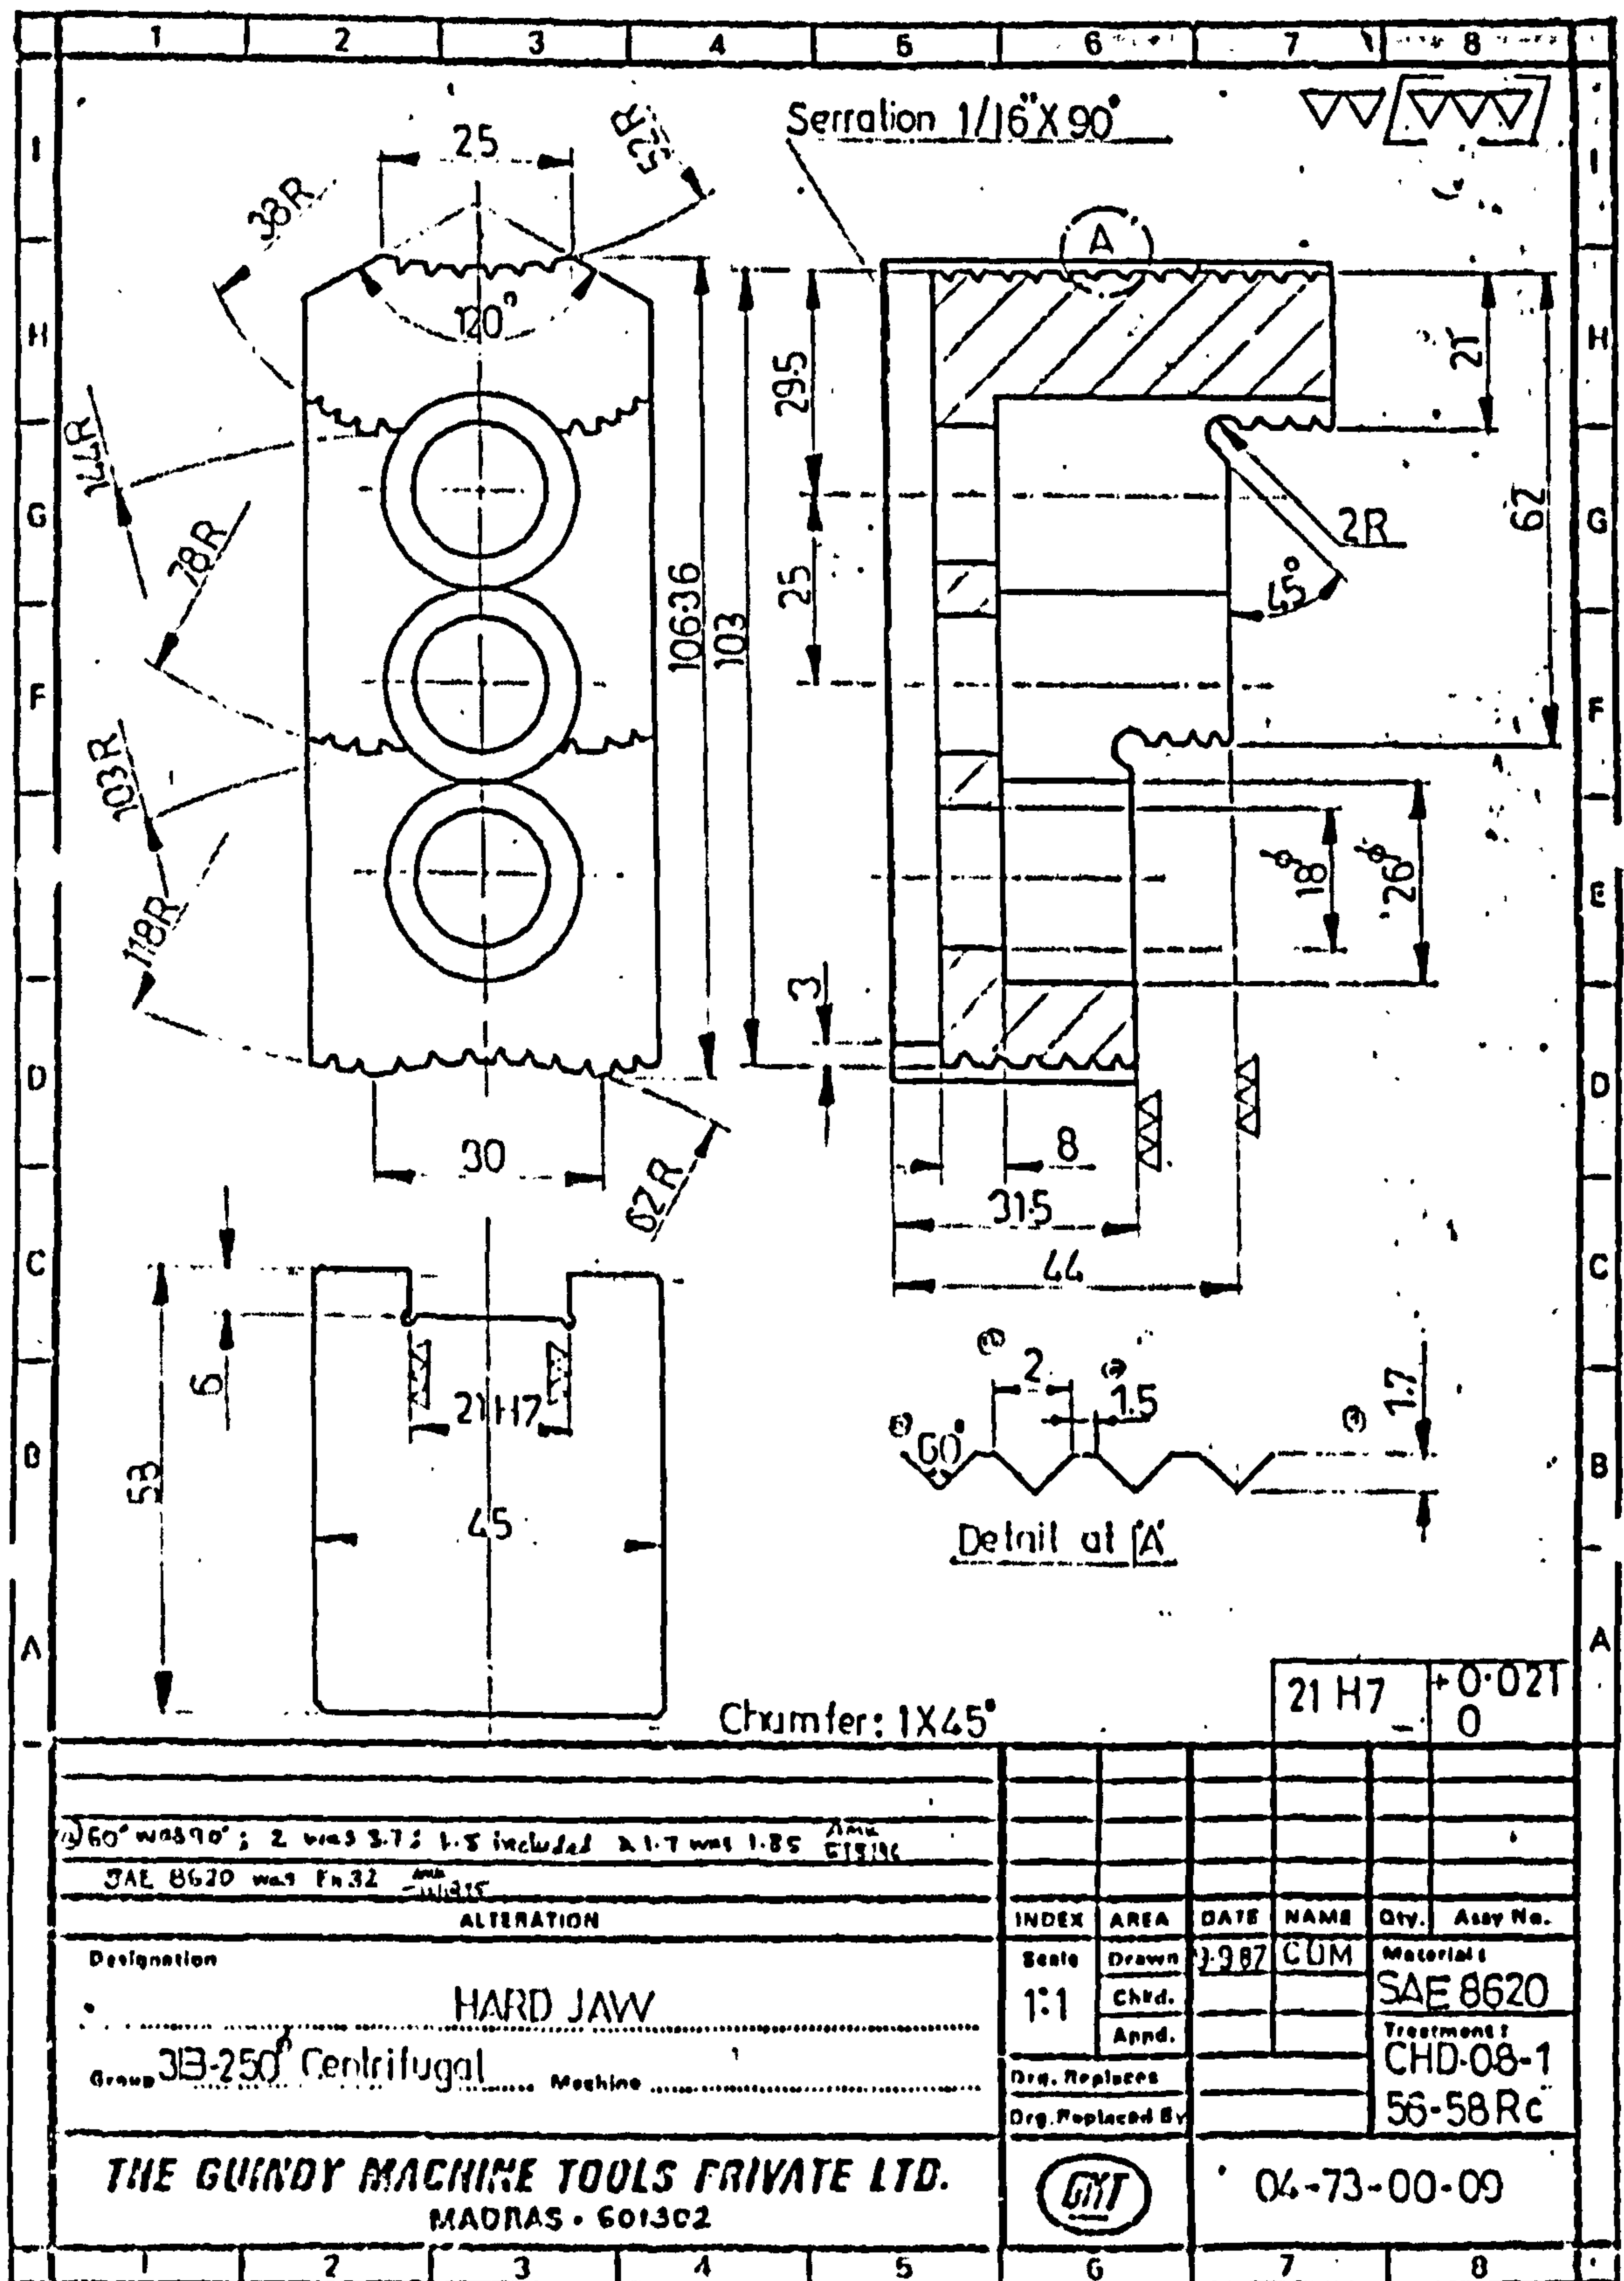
GMT Chuck Hard-Jaw – Example Manufacturing Drawing
